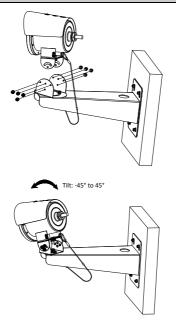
Secure the Camera to Wall Mounting Bracket
